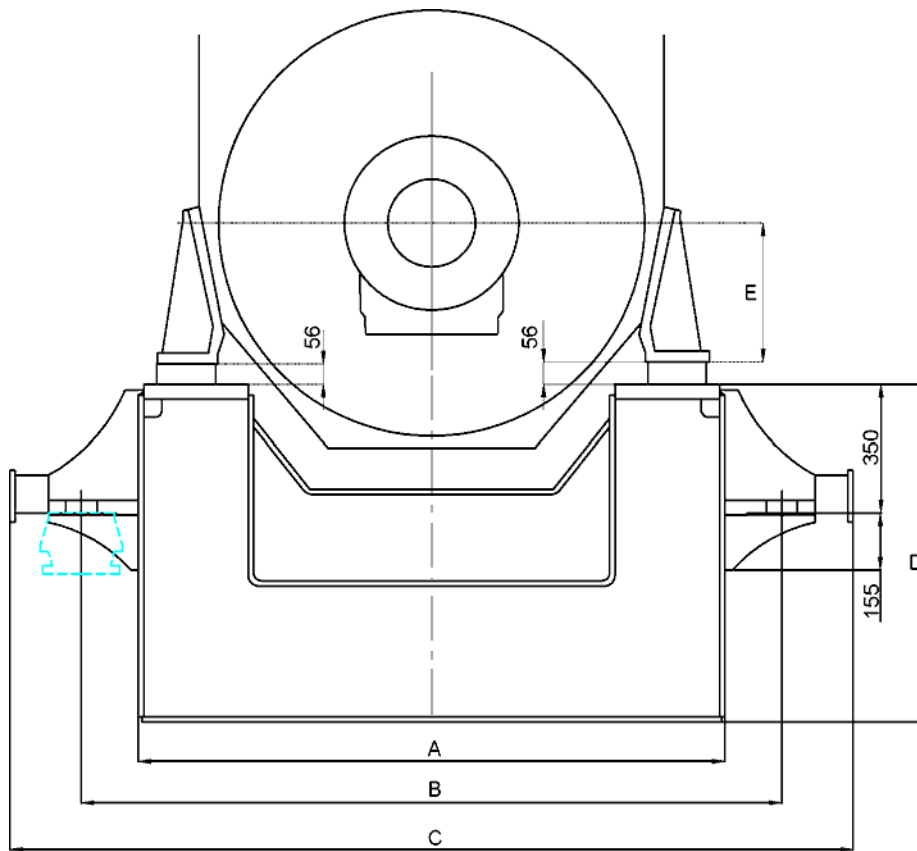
Standard generator dimensions and common base frame arrangement (9506ZT732)
